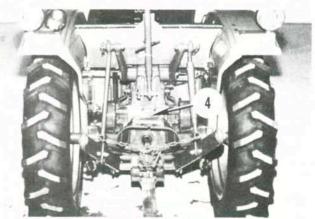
The chassis serial number is stamped on rear axle center housing.
